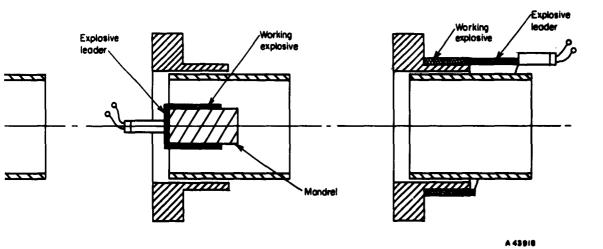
EXPLOSIVE-WELDING ARRANGEMENTS
